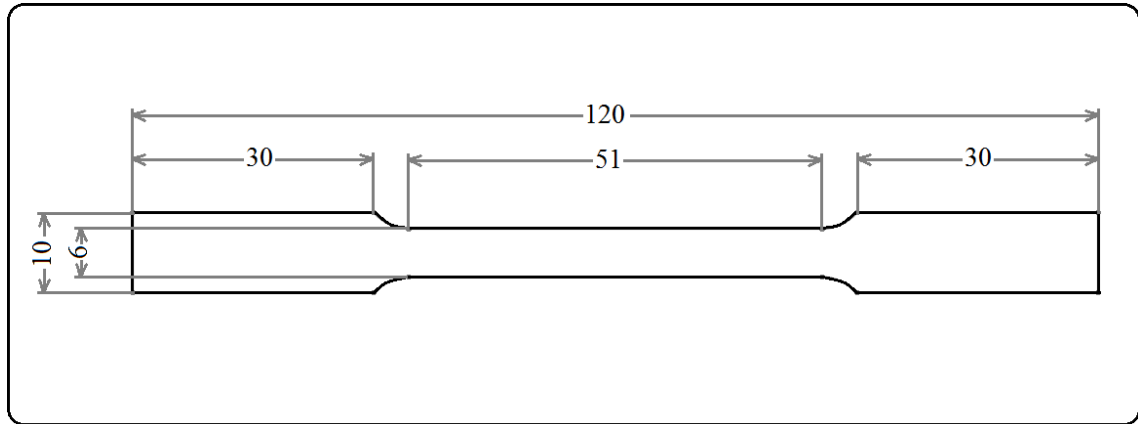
A drawing for the sub-size sheet tensile test specimen as per ASTM standard E8M (dimensions in mm).
